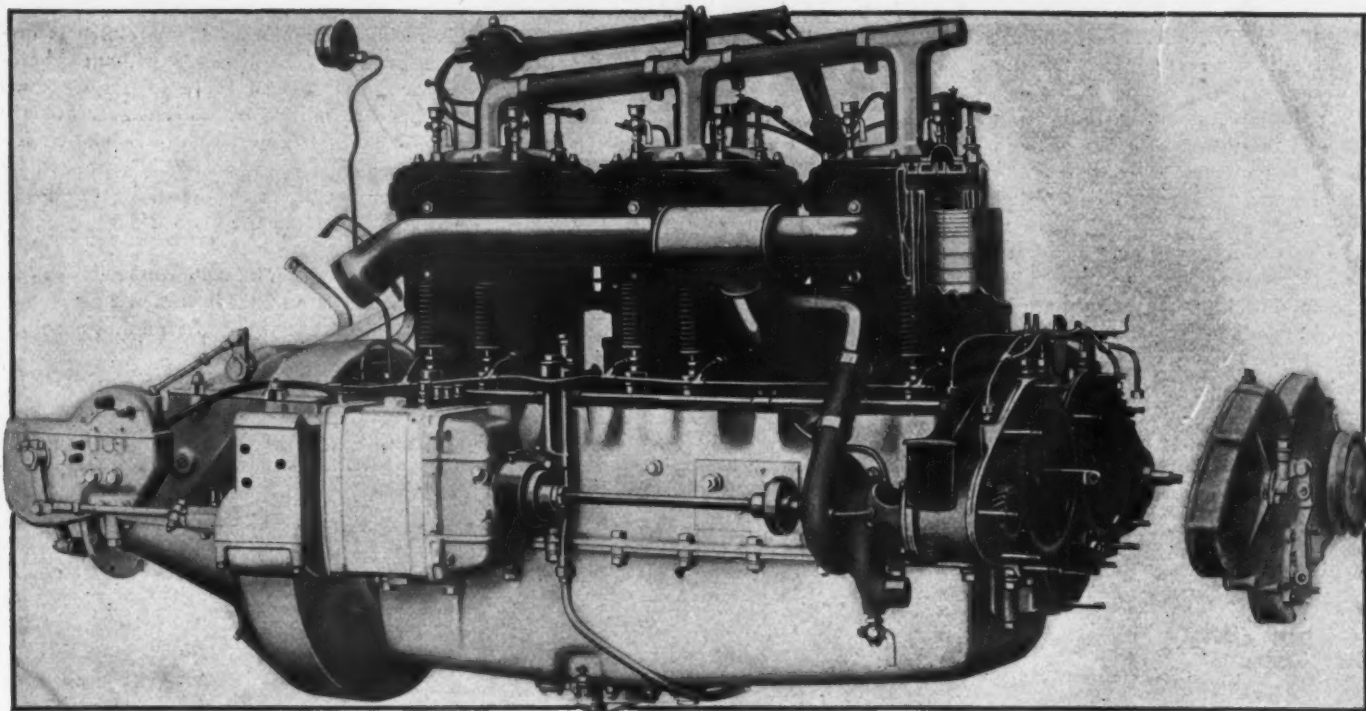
Showing the new Packard motor with the front cover removed, displaying timing gears
